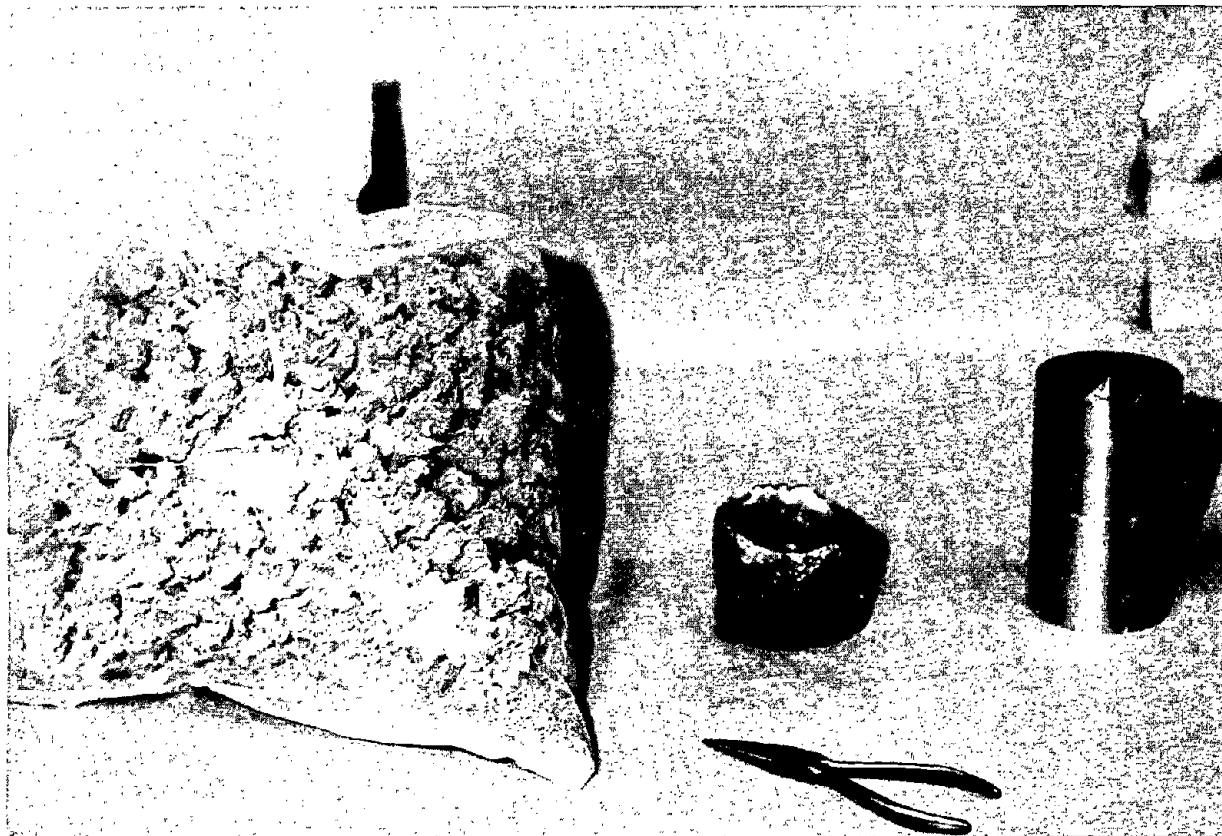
Typical sponge prior to briquetting; crown of ingot and machined ingot ready for hot-working.
